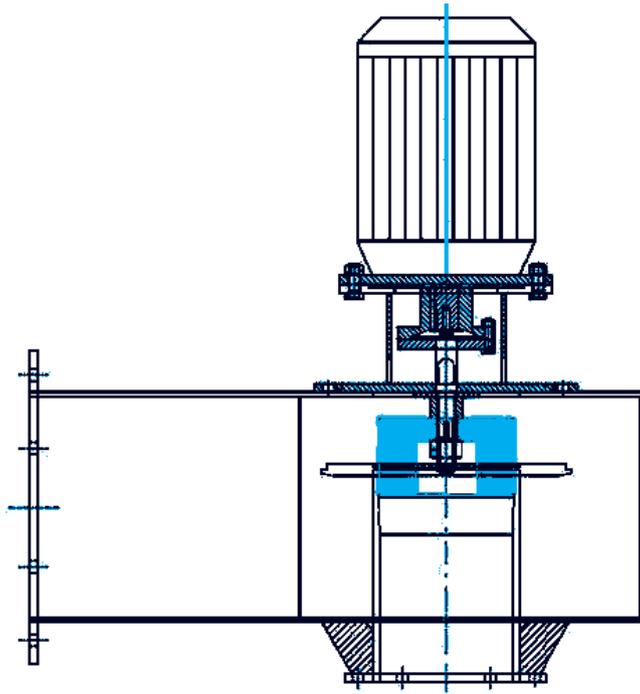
shows the generator assembly with jig (in light blue) attached to align the assembly with the runner housing
